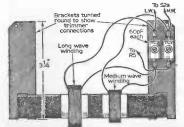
Mounting and wiring details of ferrite rod aerial and trimmers. for tuning to the best position. It should be noted that this aerial coil wire is Litz and it is essential when making soldered joints that every single strand is carefully cleaned and tinned otherwise performance may be affected. The ends can conveniently be cleaned by placing on a firm surface and scraping gently with fine emery cloth, or another method is to heat the wire ends in a small flame and while still hot, plunge them into methylated spirit after which the ends can be wiped clean and then soldered.
